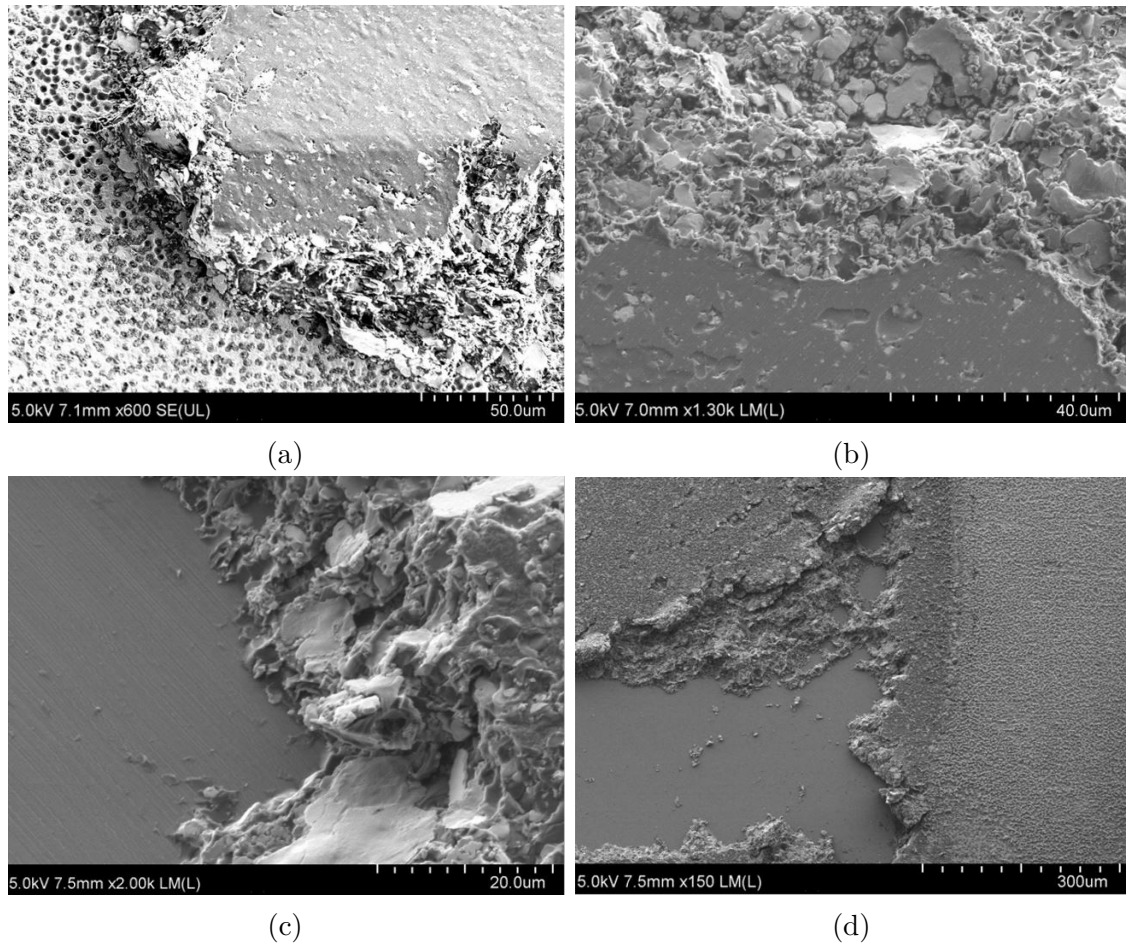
(a) & (b) Die pad side peel, cohesive crack, (c) & (d) OM side peel, cohesive crack
